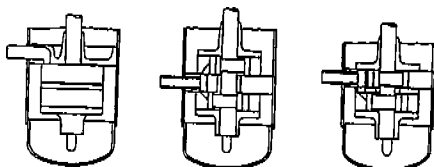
Cross-sectional view of Sanyo two-cylinder compressor
